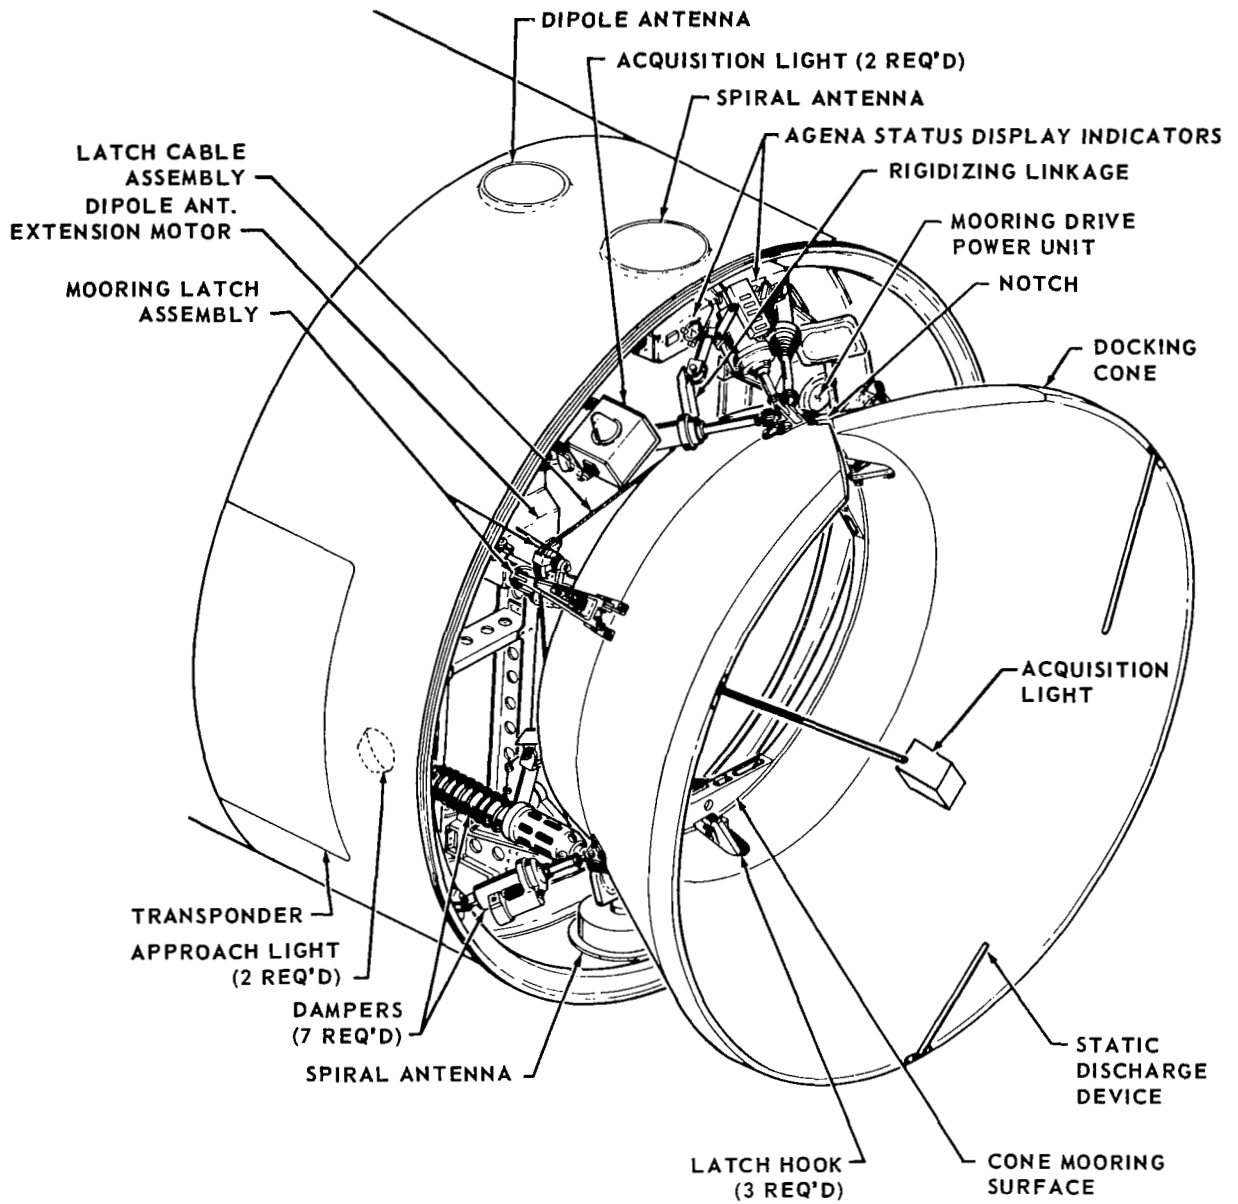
TARGET DOCKING ADAPTER ASSEMBLY
